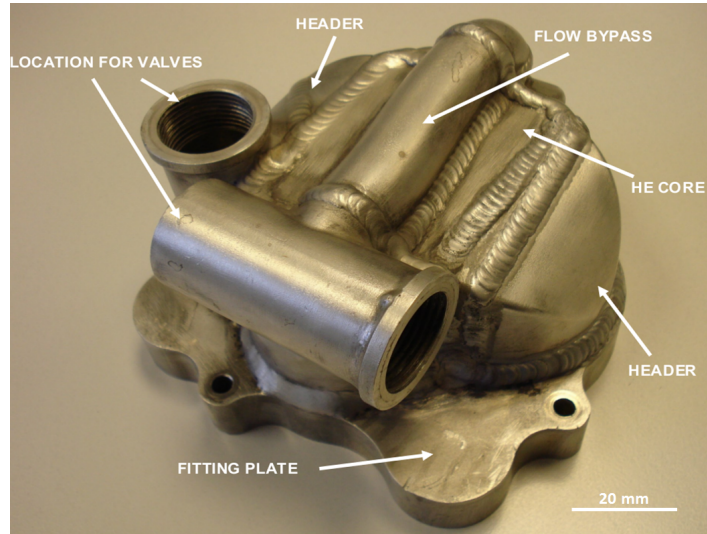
Assembled experimental HE unit with valves and headers. Inlet/outlet HE ports are located on the fitting plate.
